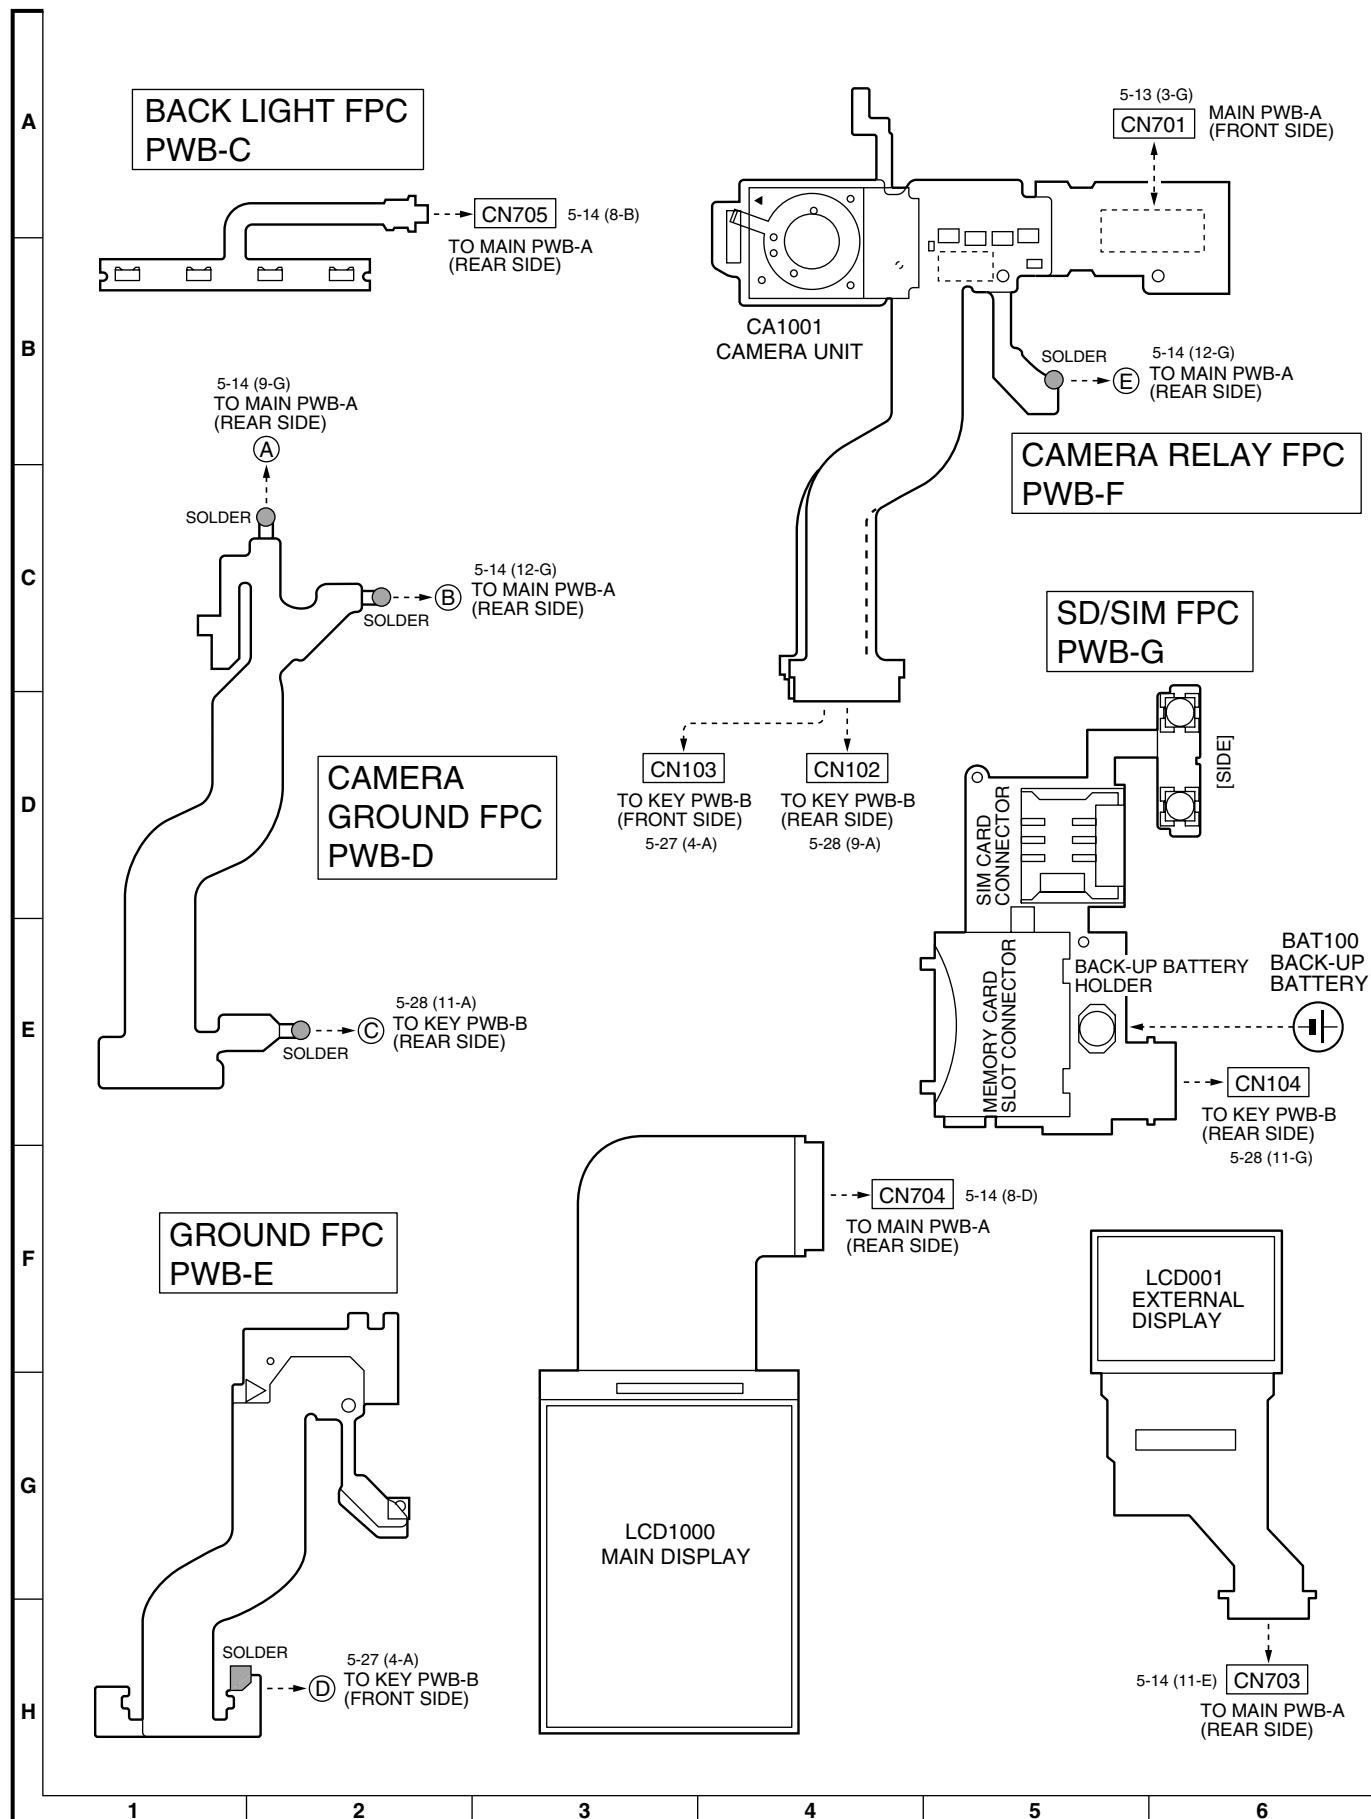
WIRING SIDE P.W.B. BOARD (5/5)
